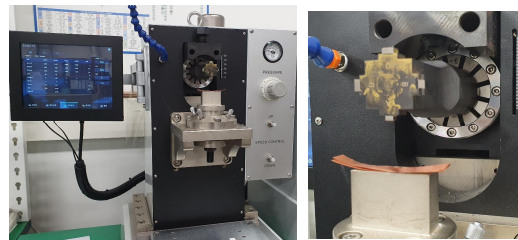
Welding machine and experimental setup (D9800, Durasonic Co., LTD, Korea)
